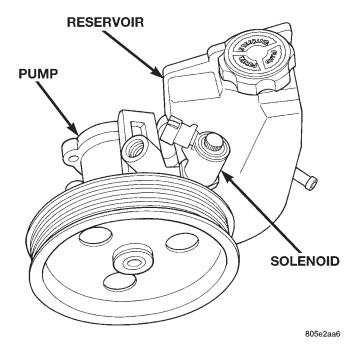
Speed Proportional Steering Solenoid CAUTION: A Speed Proportional Steering gear should not be interchanged with any other steering gear.
